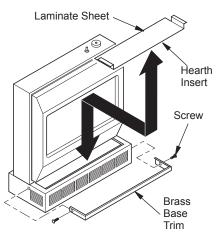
Placing Hearth Insert on Heater Base and Attaching Brass Base Trim
